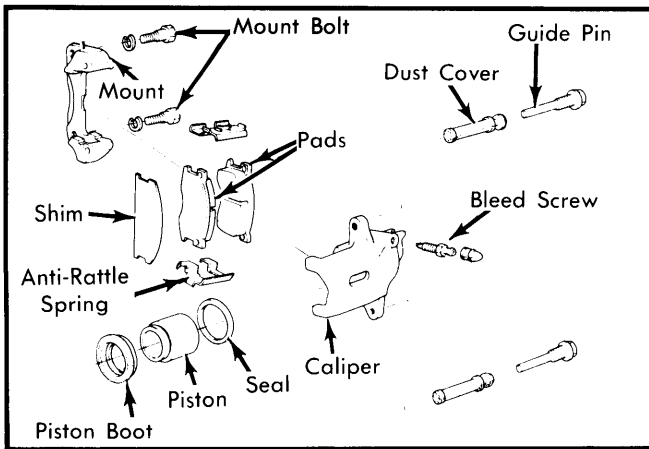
Exploded View of 626 and RX7 Front Disc Brake Caliper Assembly
